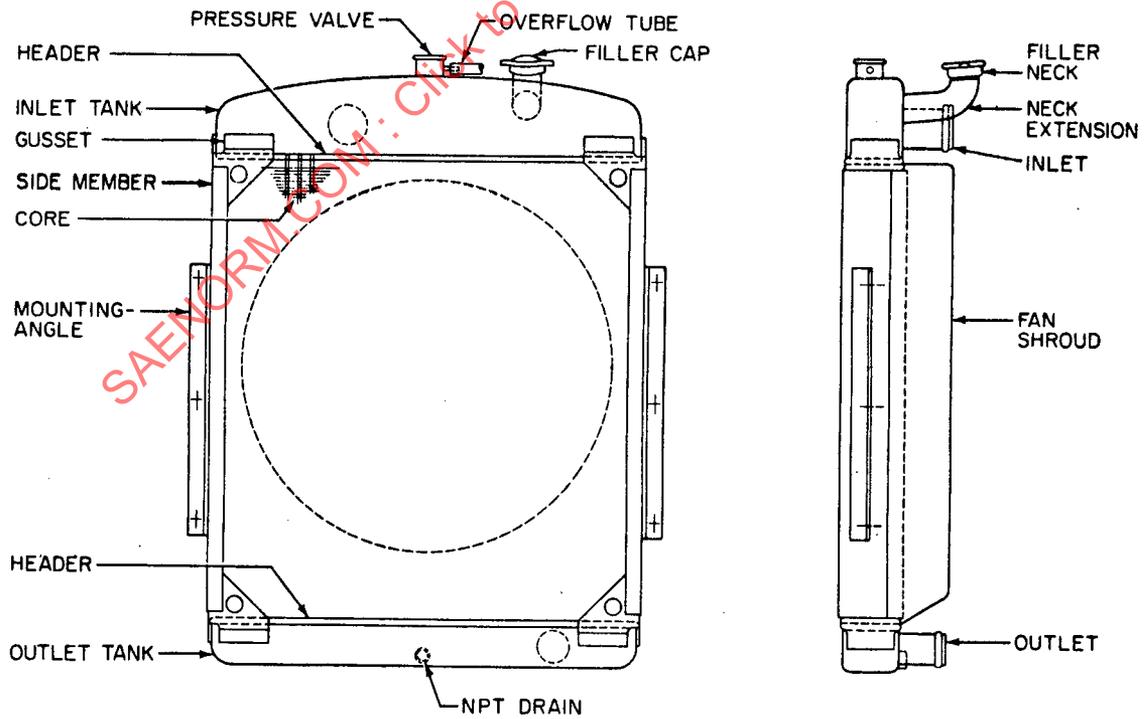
Heavy-Duty Radiator, Sheet Metal Type
